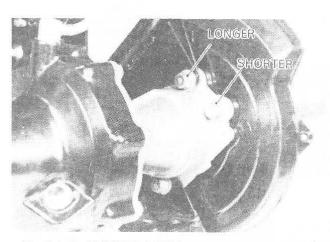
On YTM/YFM 200/225 models, the longer caliper mounting bolt must be installed in the top hole and the shorter bolt in the rear hole (Sec 10)
